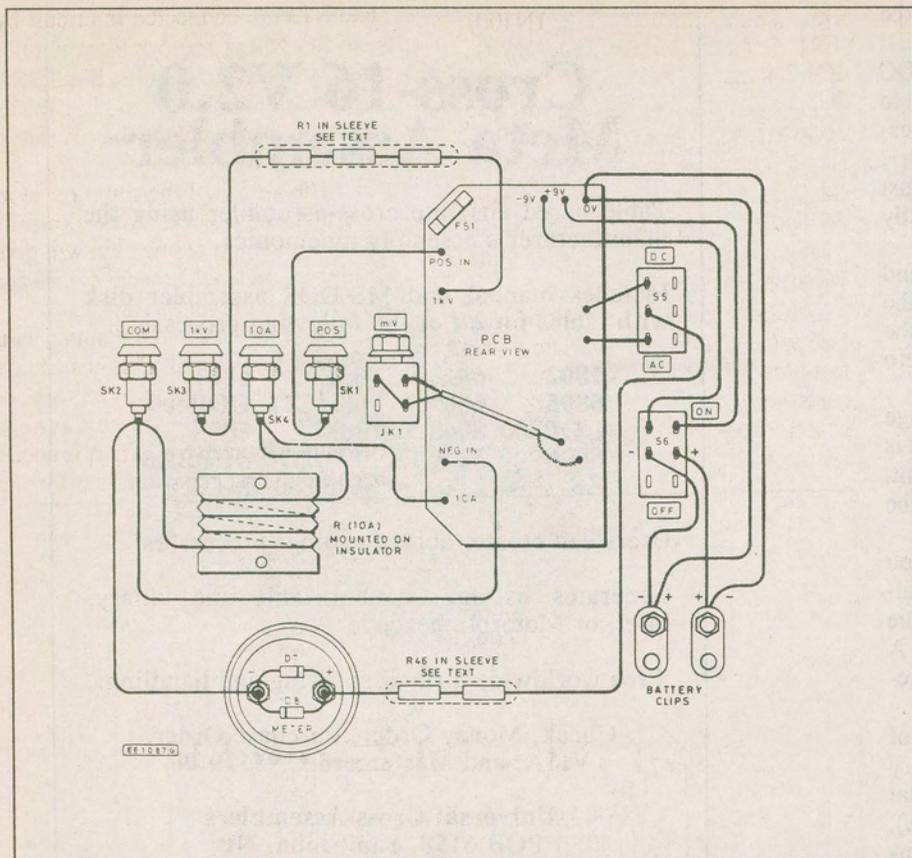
Interwiring details for the off-board components. The circuit board and components are all mounted on the rear of the front panel. The series resistors are encased in plastic sleeving.
